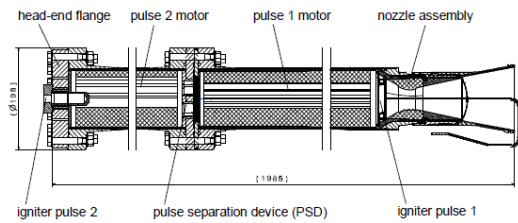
Sketch of a double pulse technology demonstrator motor of BC/P[3]
